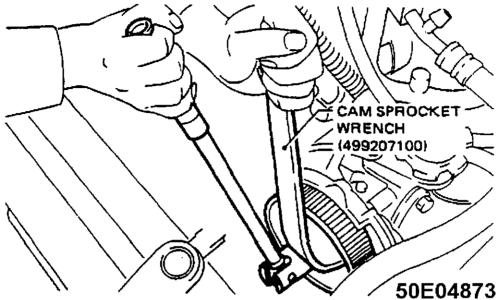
Removing Left Camshaft Pulley Courtesy of Subaru of America, Inc.
